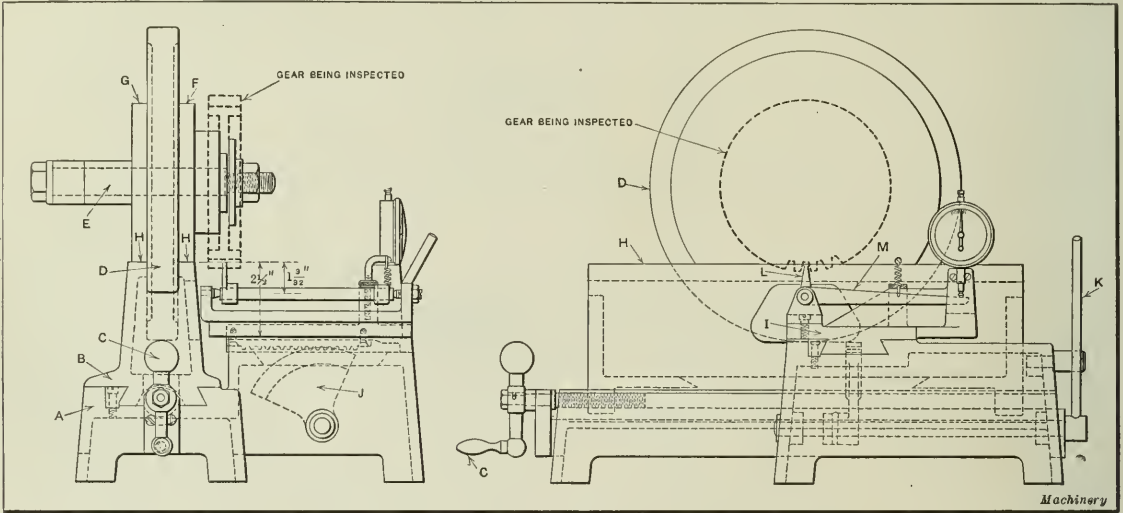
Fixture for testing Involute Curve of Spur Gear Teeth
